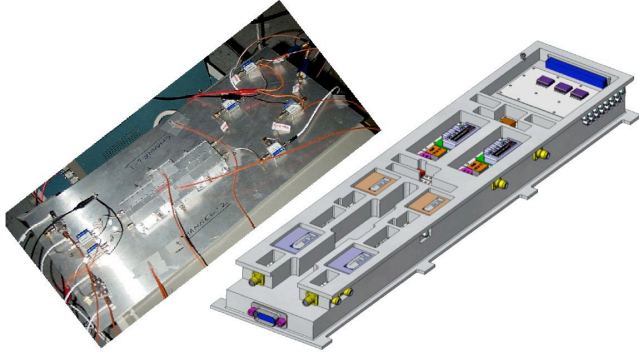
Photograph of the current breadboard design and a CAD drawing of the planned mechanical layout.
